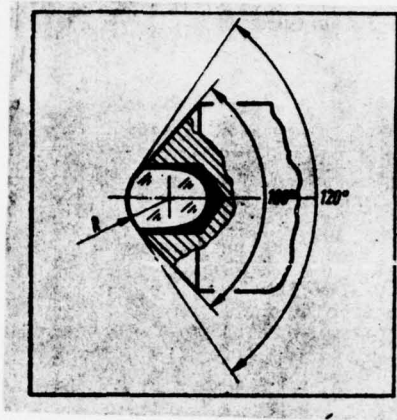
Mounted Carbonado Diamond for Burnishing of Metal Surfaces [2].
